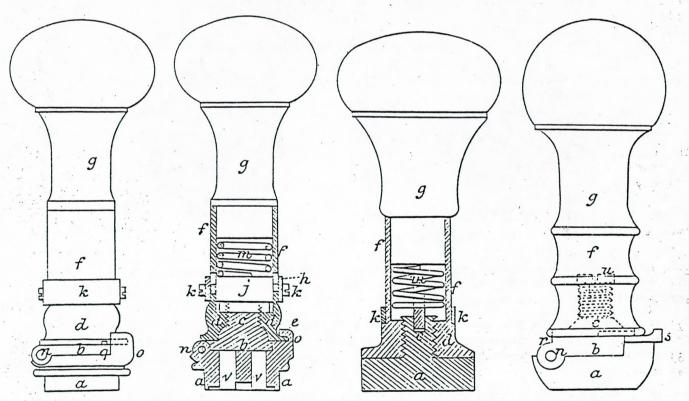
Some of the Massey models (2nd drawing is cross section of 1st)
